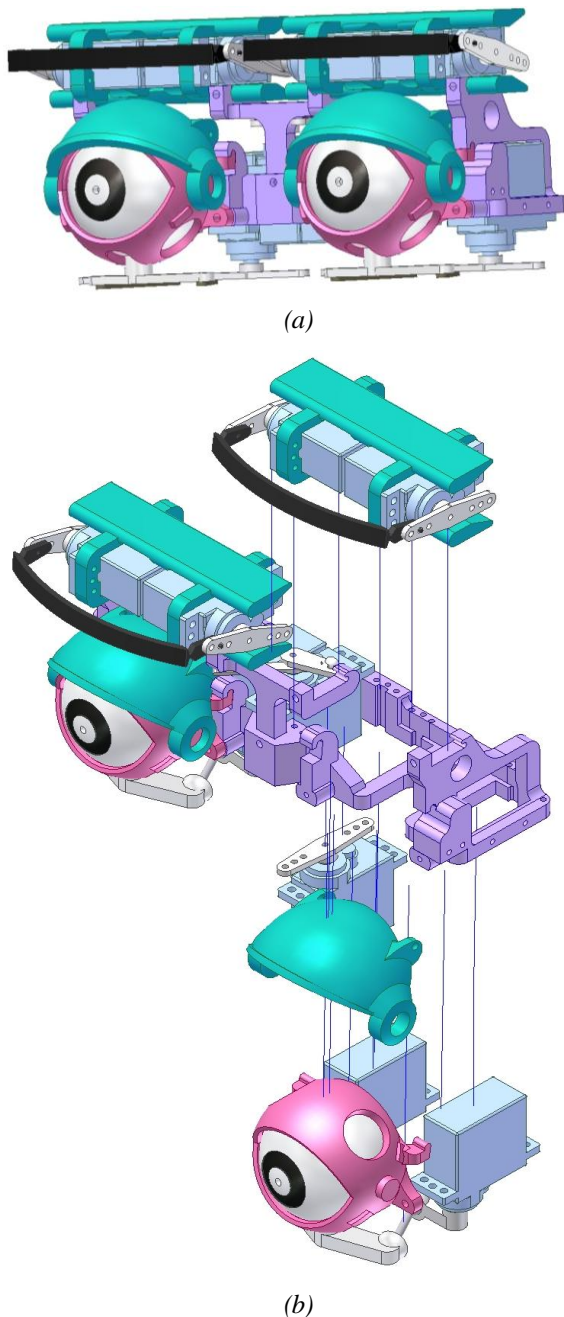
Design of the eye-system: a) compact view; b) exploded view of one eye
